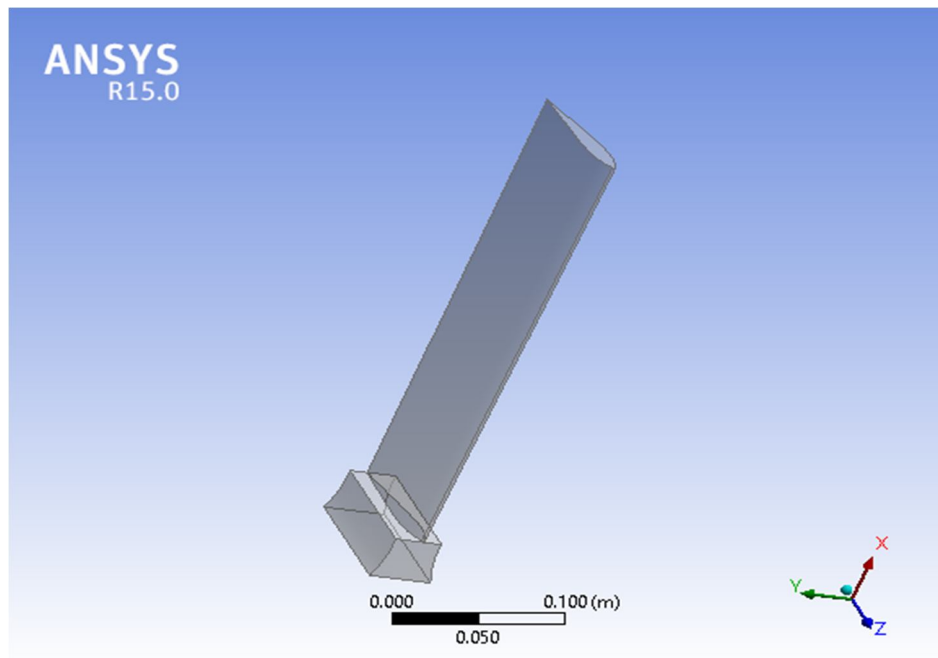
CAD Model of Compressor blade with 5.5<sup>0</sup> angle
